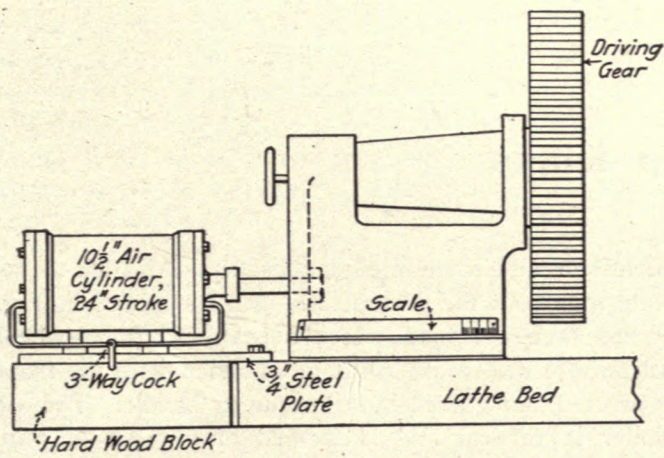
Application of Power Traverse to Tailstock of Car Wheel Lathe.
